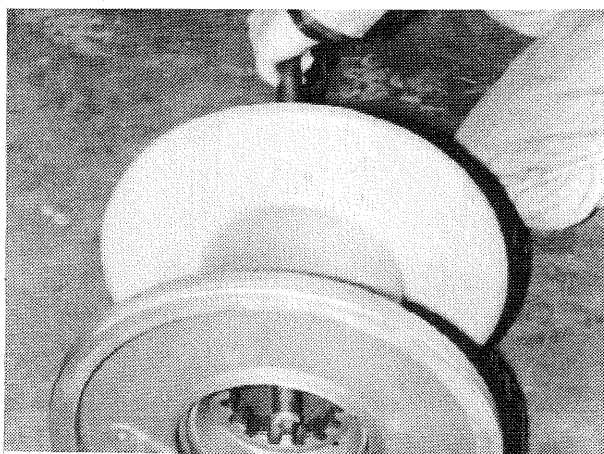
Removal of Drum & Shaft, and Ring Gear (3 of 4)
